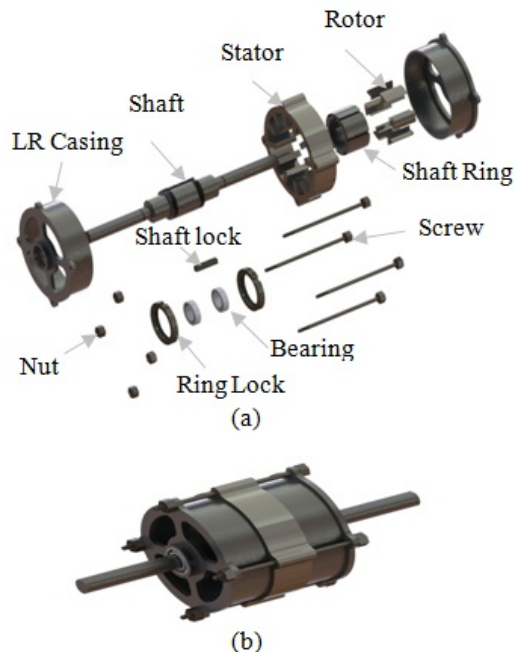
The (a) Internal and (b) External 3D view of 12S-6P FEFSM with segmental rotor prototype.
